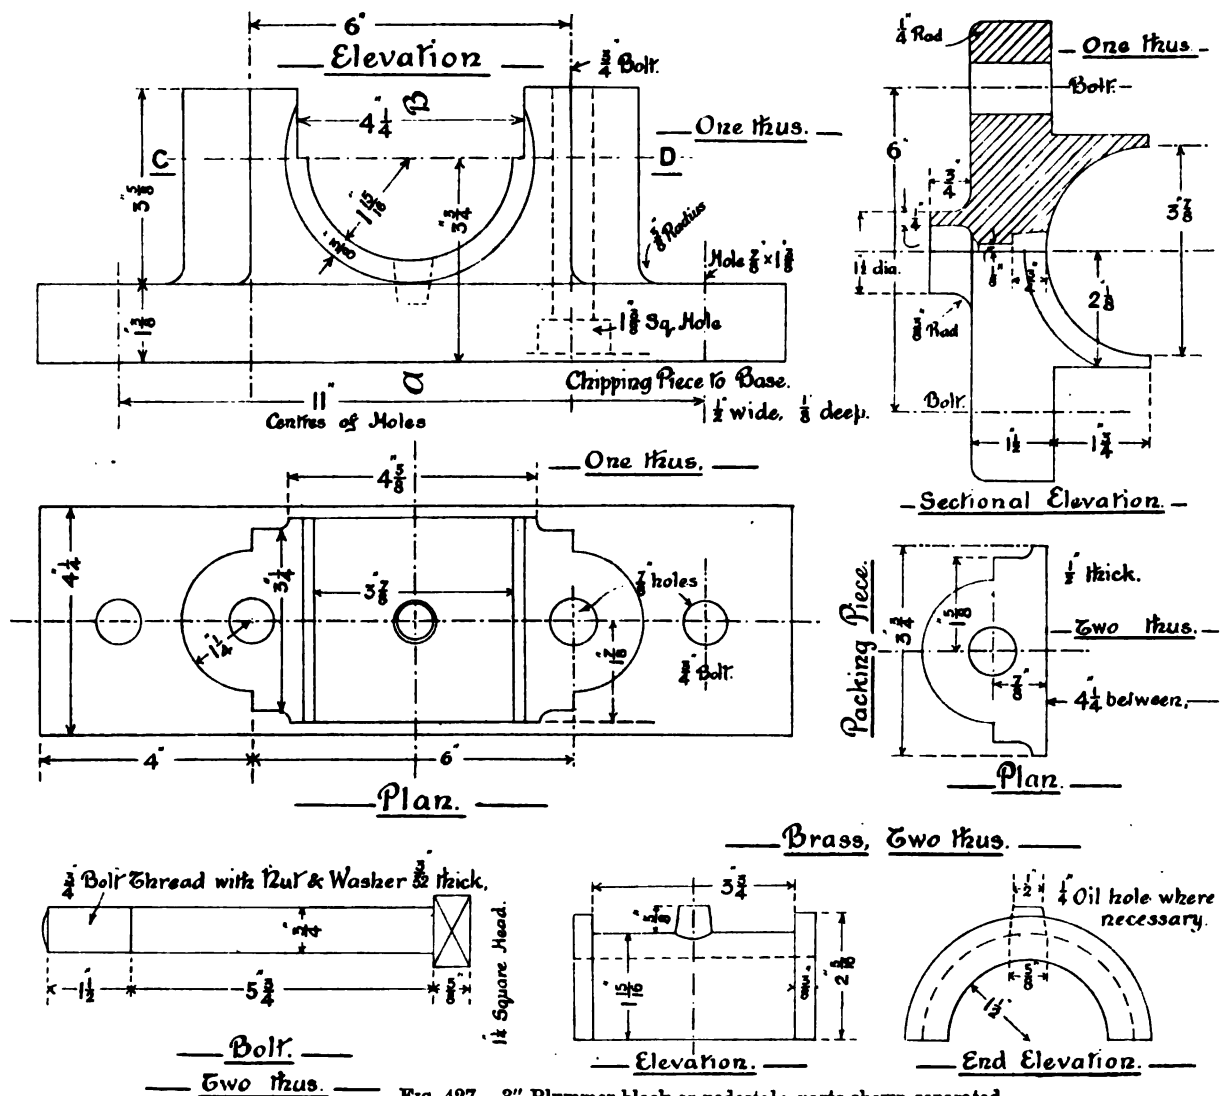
3" Plummer block or pedestal: parts shown separated.
